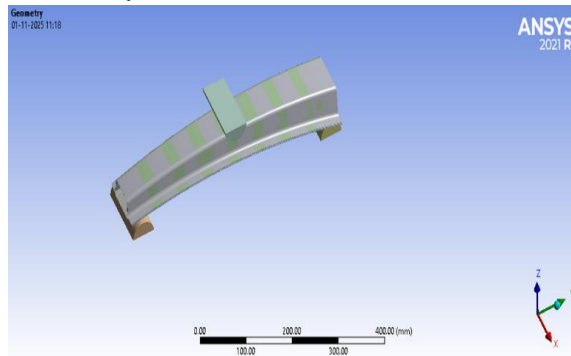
Geometry of Glass Epoxy reinforced B-Pillar outer panel.
